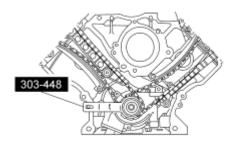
Camshaft Gear Bolt Courtesy of FORD MOTOR CO.
